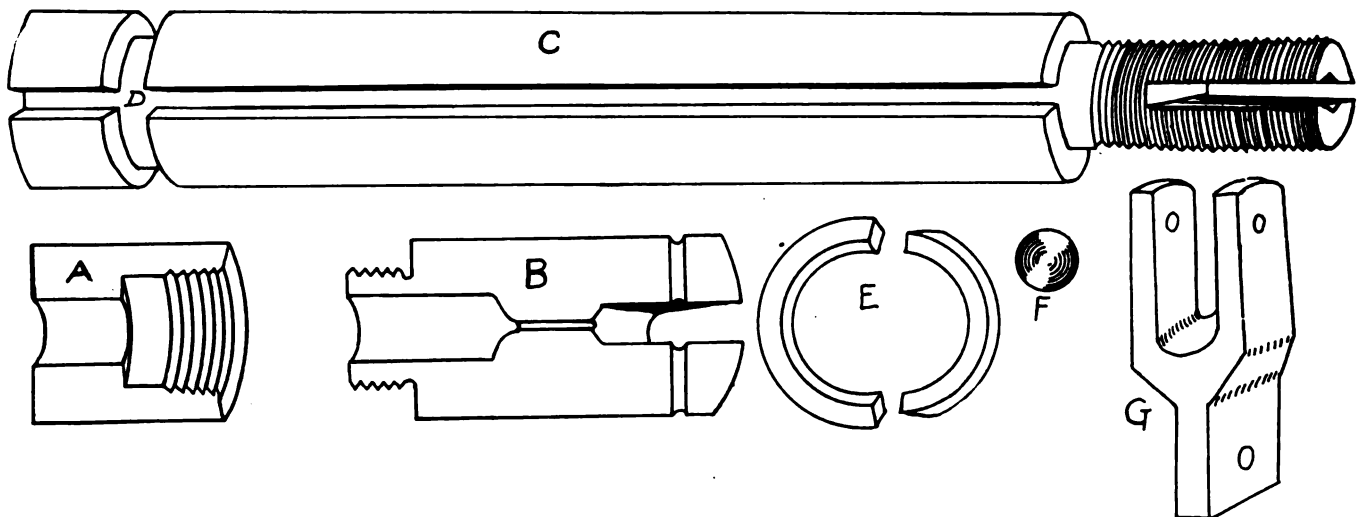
SHOWING DETAILS AND PARTS OF THE SHOP-MADE BORING MACHINE
